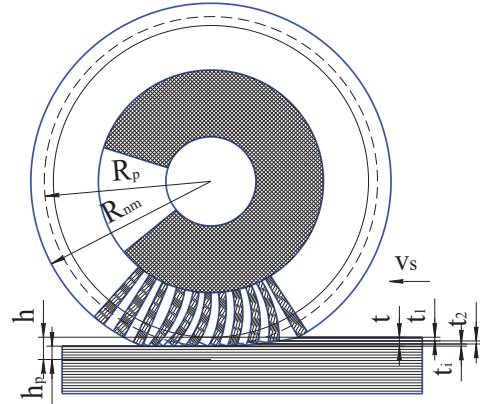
Modeling the process of PCW surface cleaning by a needle milling tool
